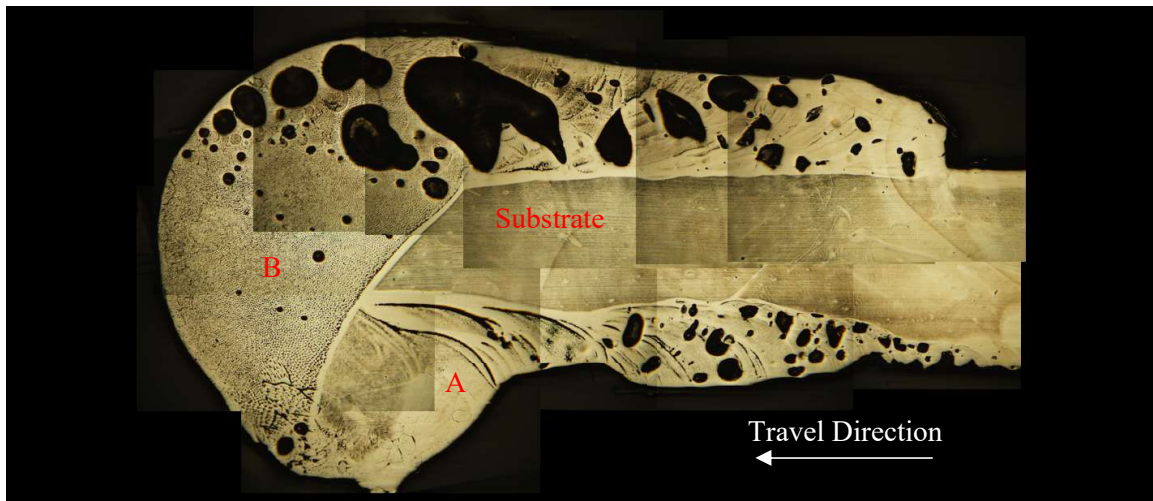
Optical Microscopy results for UI-GTAAM deposits. Two welds are present, weld A and weld B, with weld B slightly overlapping the tail end of weld A.
